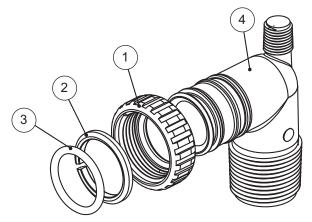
1" PVC Male NPT Elbow Assembly (CV3007)
